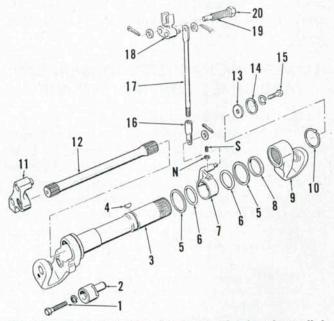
Exploded view showing torsion bar, lower link hangers and draft control linkage. Refer to Fig. 338 for adjustment of draft control link (16 and 17).
